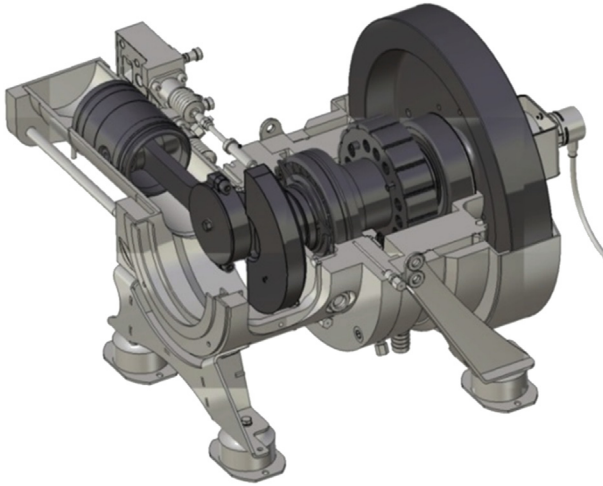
View of a crank train piston expander (Daccord et al., 2013).
